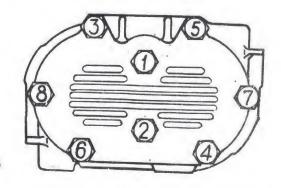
SEQUENCE OF TIGHTENING OF COMPRESSOR CYLINDER HEAD NUTS
